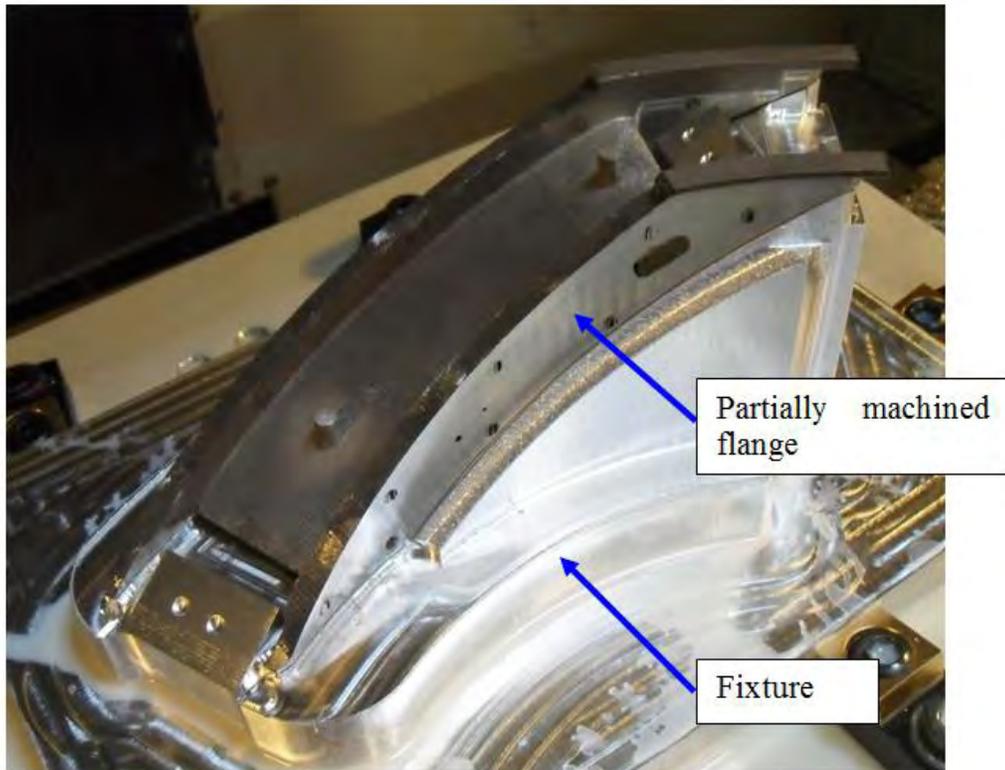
Partially machined nozzle vane in the machining fixture.
